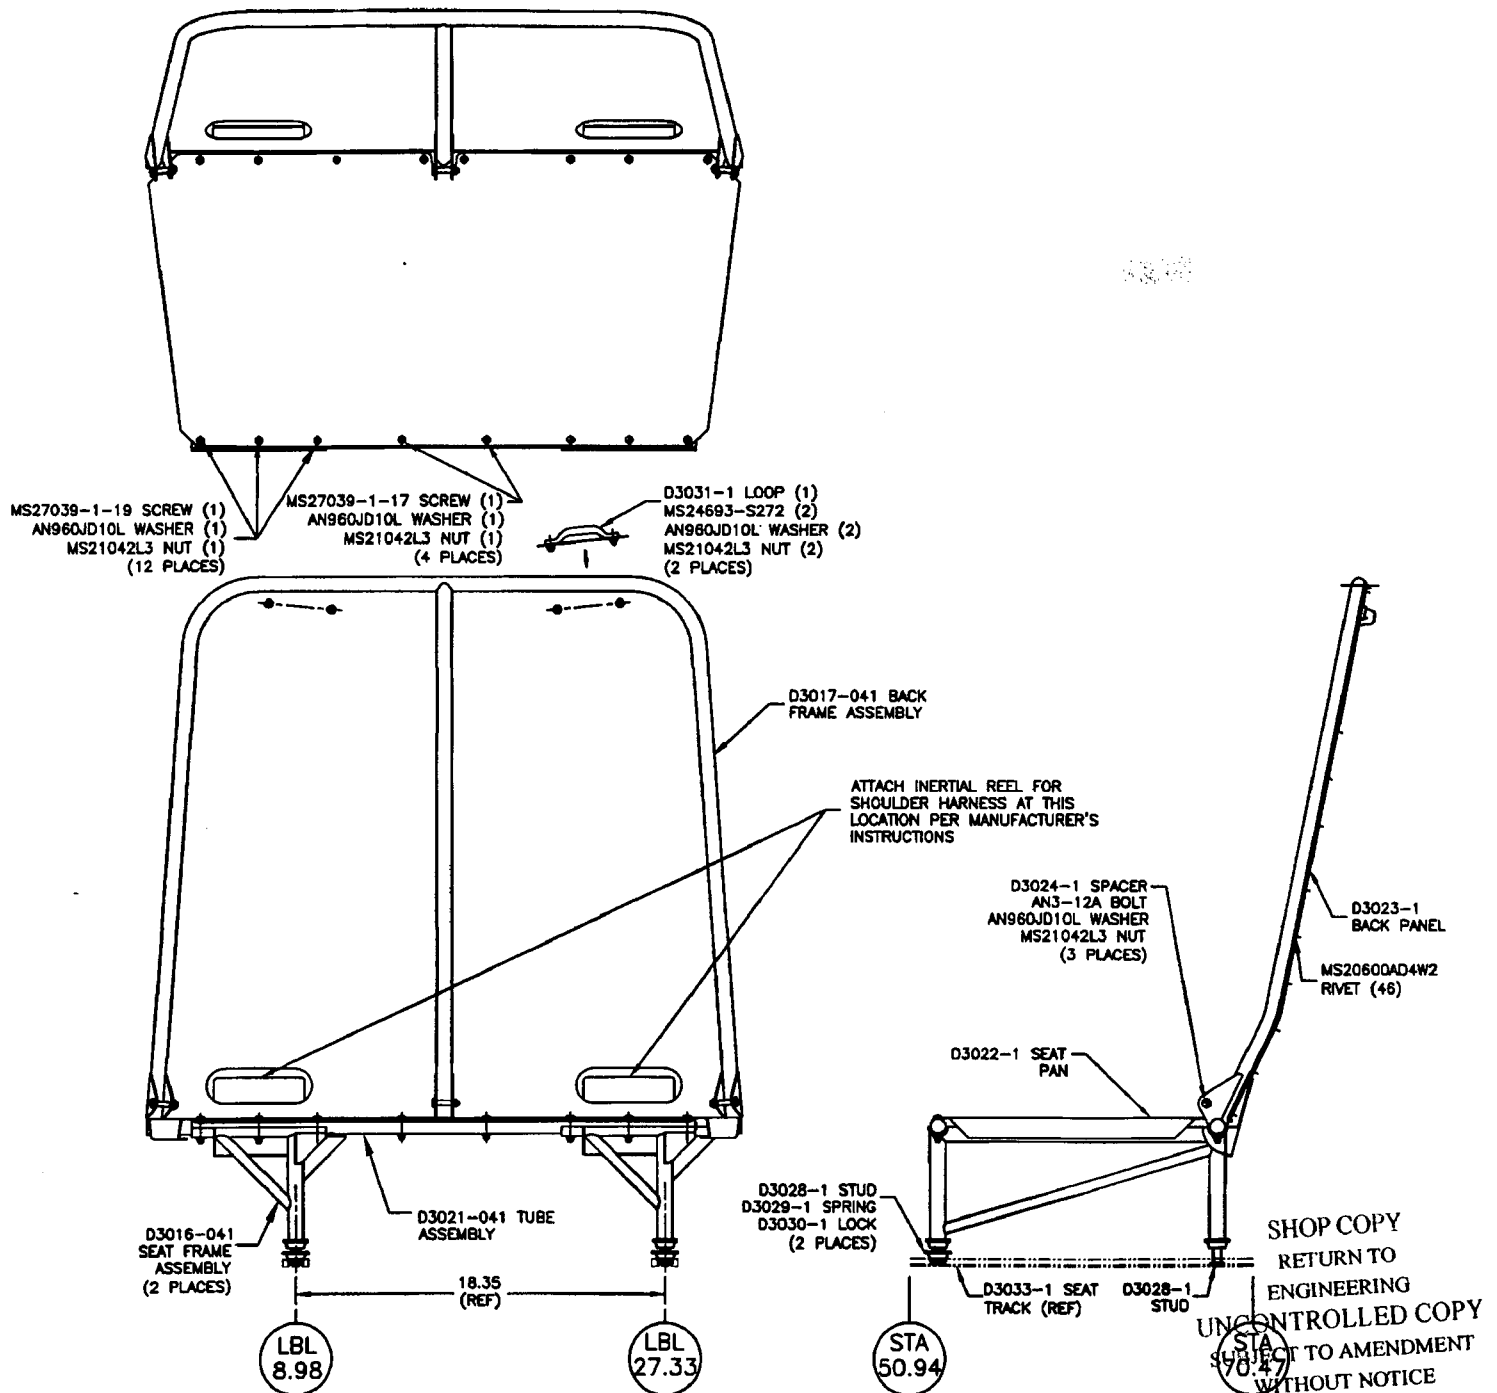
Installation of D350-689-041 Dual High Back Seat Assembly
